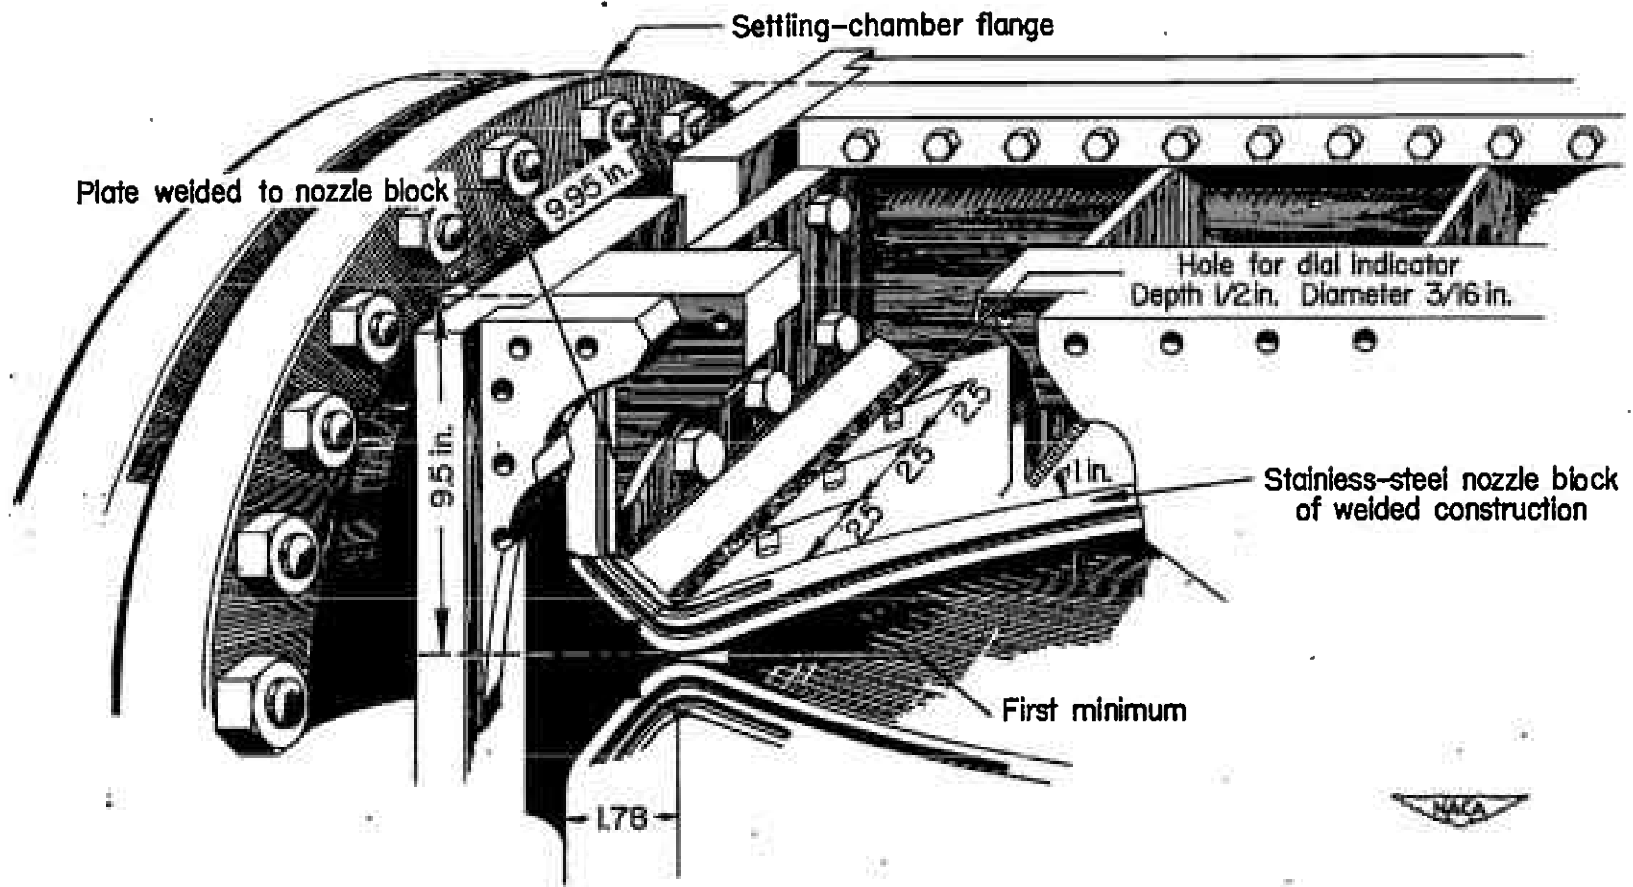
Cutaway view of a part of the nozzle with the type of construction shown.
